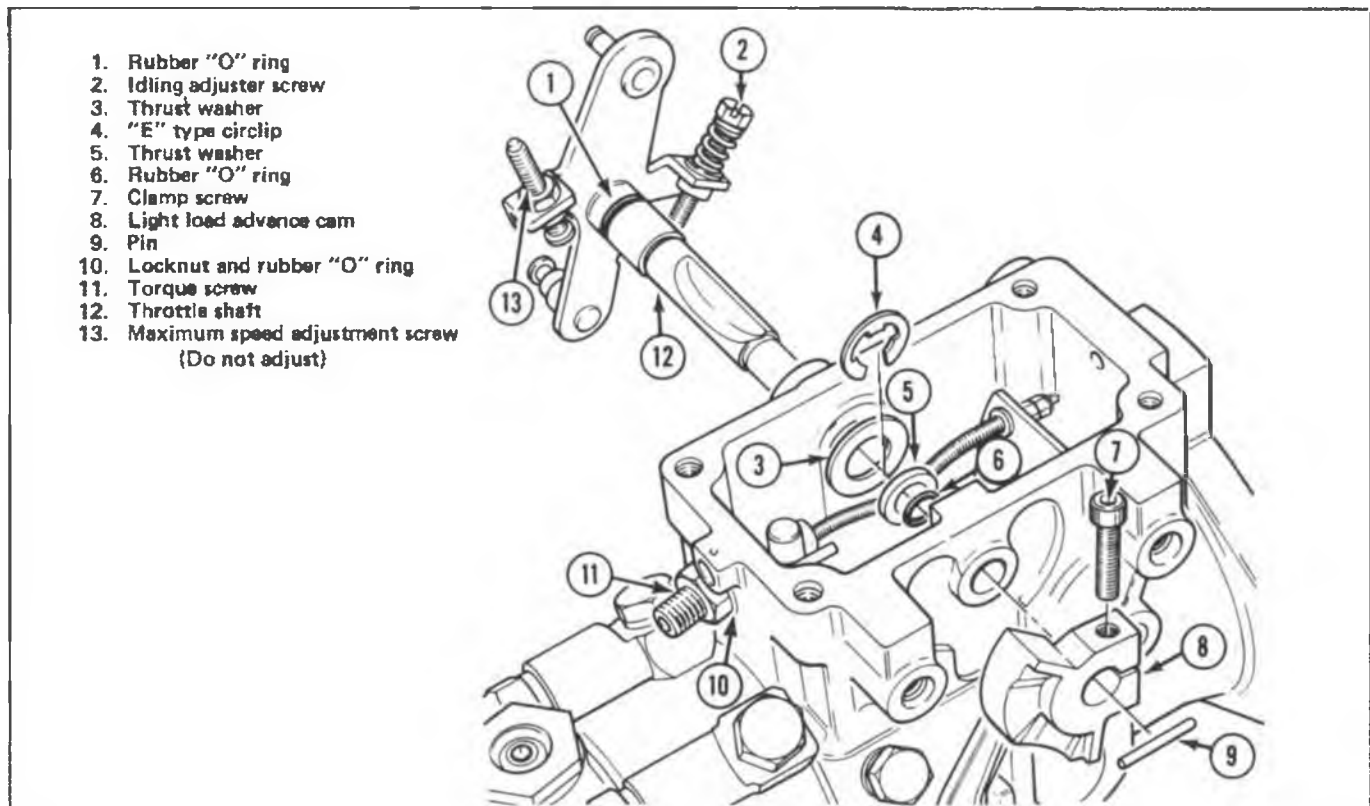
CAV Pump Throttle Shaft and Seats
